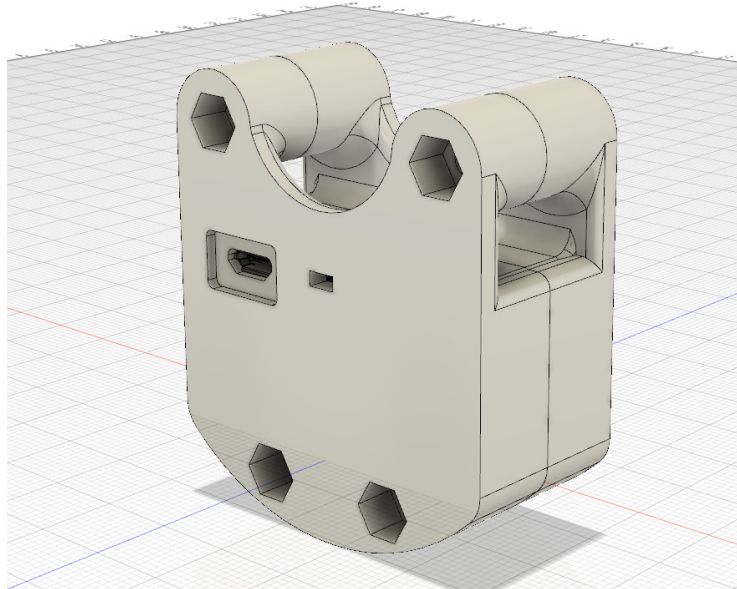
Assembly view of the housing. The housing mostly consists of flat surfaces and perpendicular walls. Two halves are secured by M3 screws and nuts.
